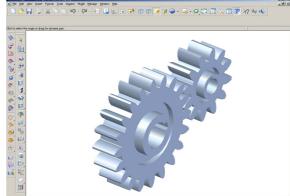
The spur gearing for mounting on parallel shafts with straight teeth using Solid Edge
